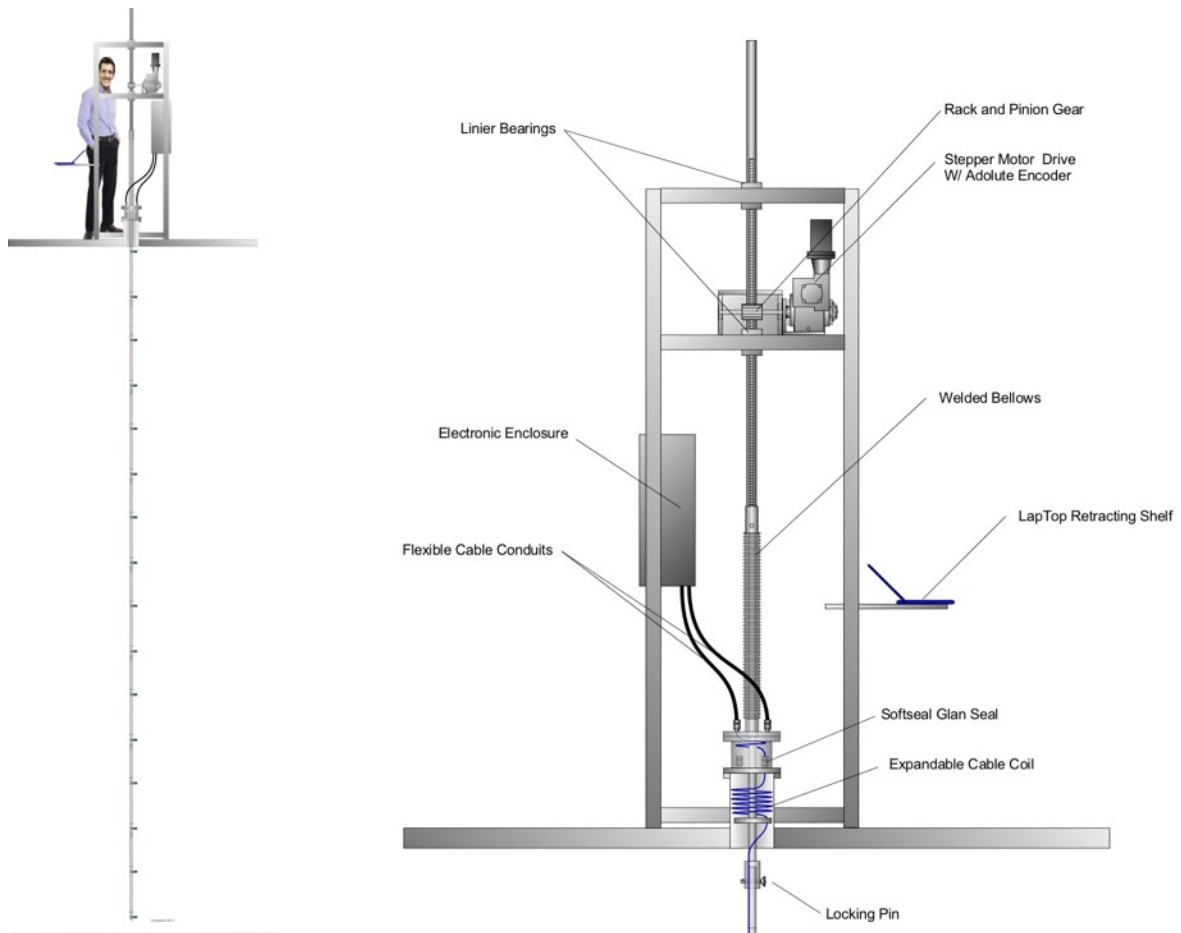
On the left is the Hawaii T-gradient monitor overview with a person next to the drive assembly for perspective. On the right are the details of the assembly drive showing details of the seal, welded bellows, stepper motor, rack and pinion gear and electronic enclosure.
